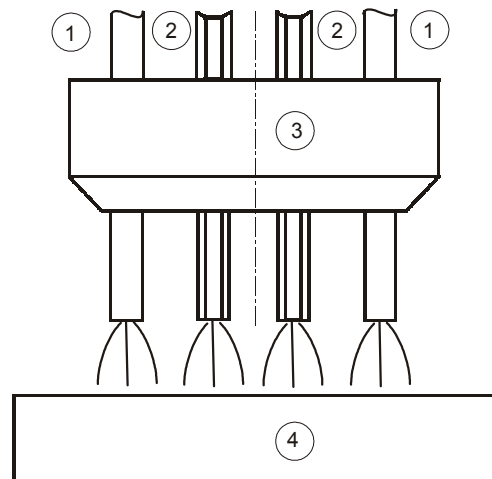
Joint contact tube for surfacing with solid and flux cored wires: 1 - solid wire; 2 - flux cored wire; 3 contact tube; 4 - workpiece
